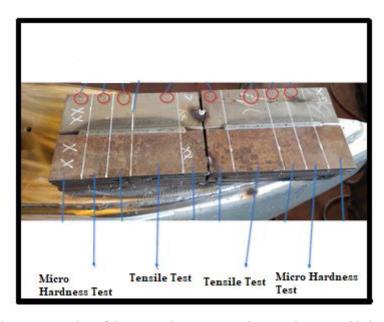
Representation of the areas where test samples are taken on welded parts.
